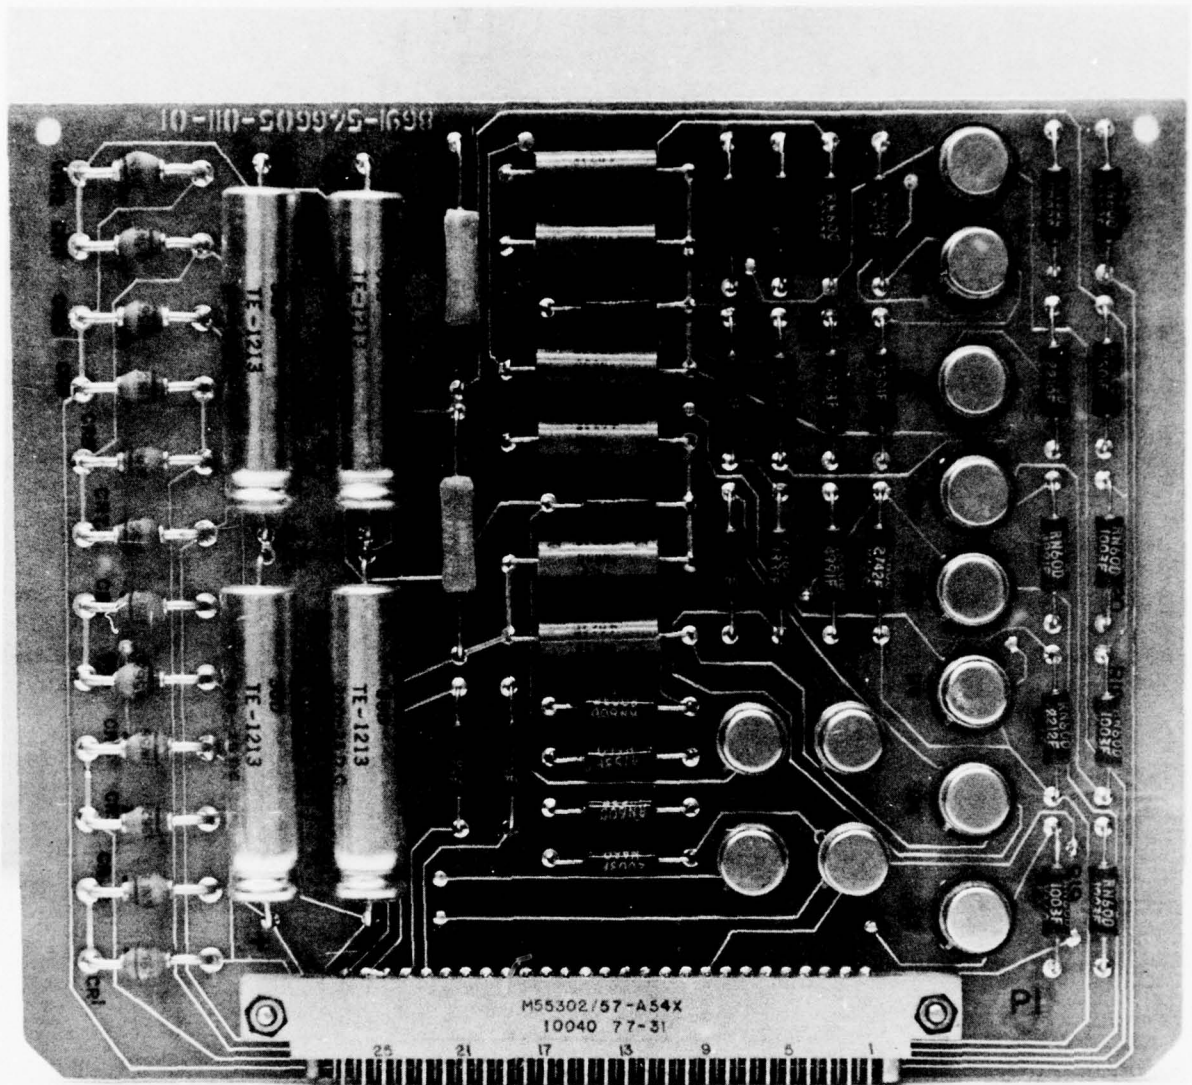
EDU PRINTED CIRCUIT BOARD
